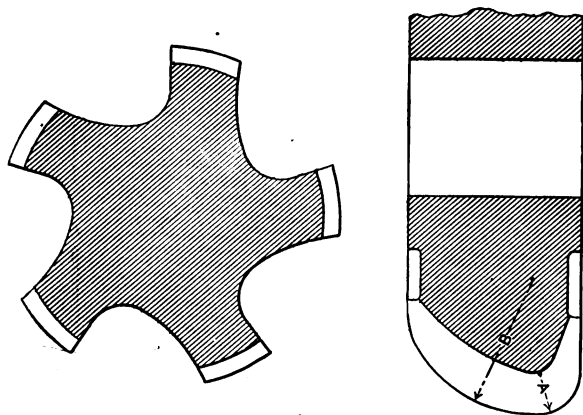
Form of Flute for Machine Taps, and Fluting Cutter Used
